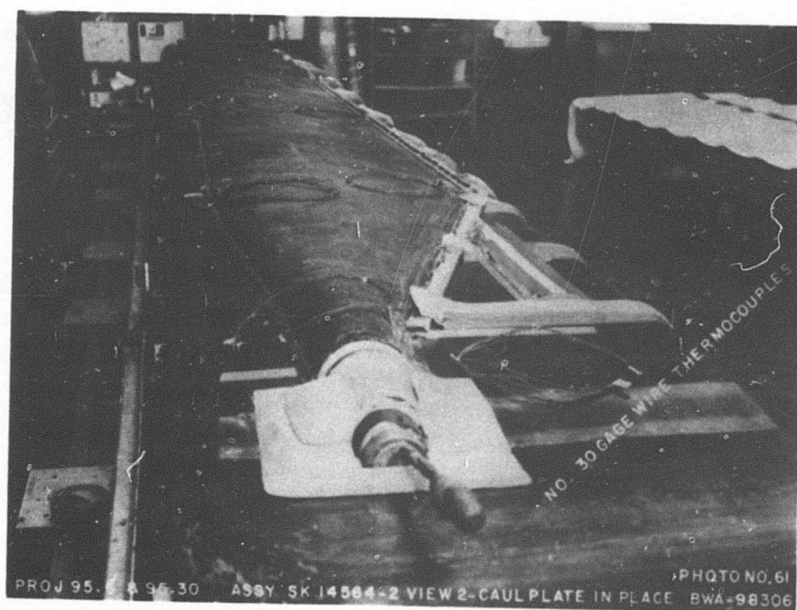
Root-End View of Blade in Final Assembly With Caul Plate in Place.
